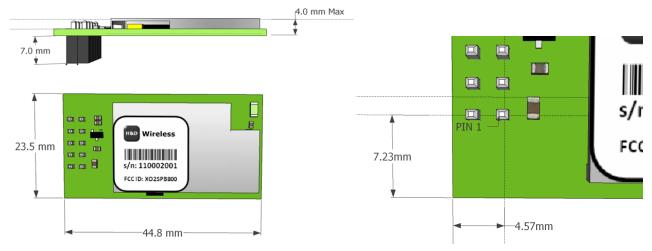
Mechanical drawing, SPB800P module with 2x5 pin socket
